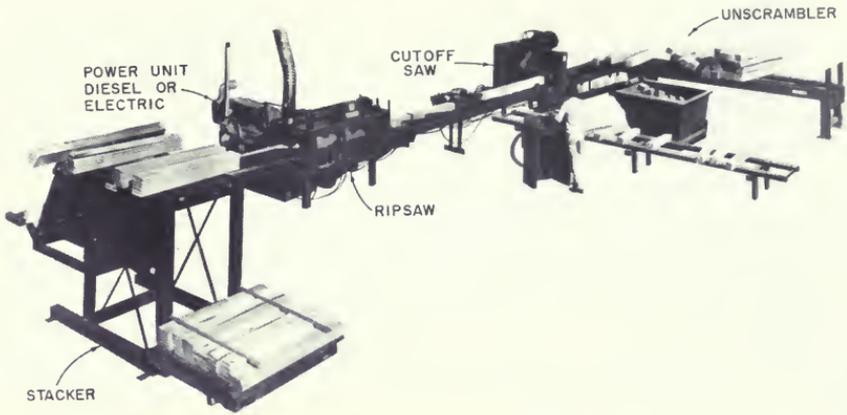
Production line for feeding cants, crosscutting them to deckboard or stringer length, gang-ripping them into boards, and stacking the boards. (Photo from EZ Manufacturing Company.)
